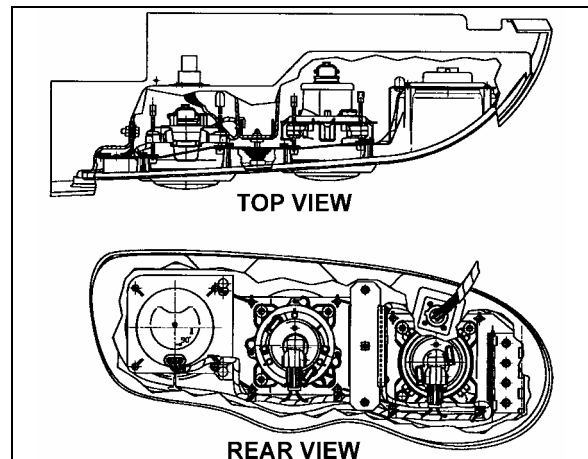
HEADLIGHT ASSEMBLY TOP & REAR VIEW
